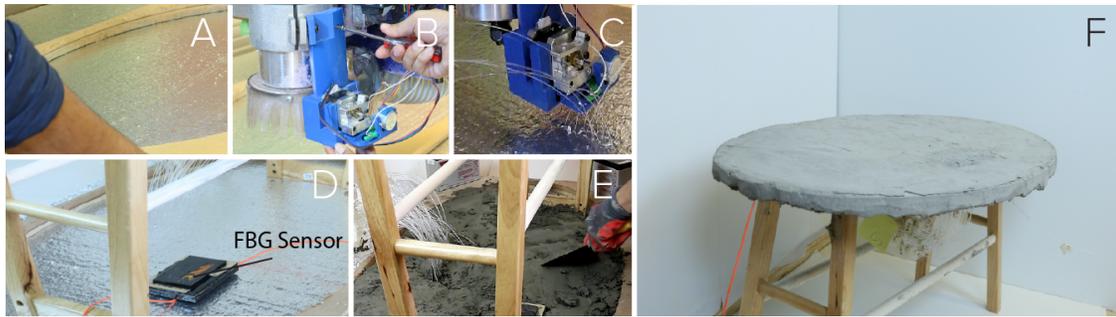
Fabrication Process for Active Cement Table including milling a mold using a CNC mill (A); attaching the fiber insertion hardware to the mill (B); inserting the optical fibers (C); placing the FBG Sensor (D) into the mold; casting cement into the mold (E); and the finished table (F).
